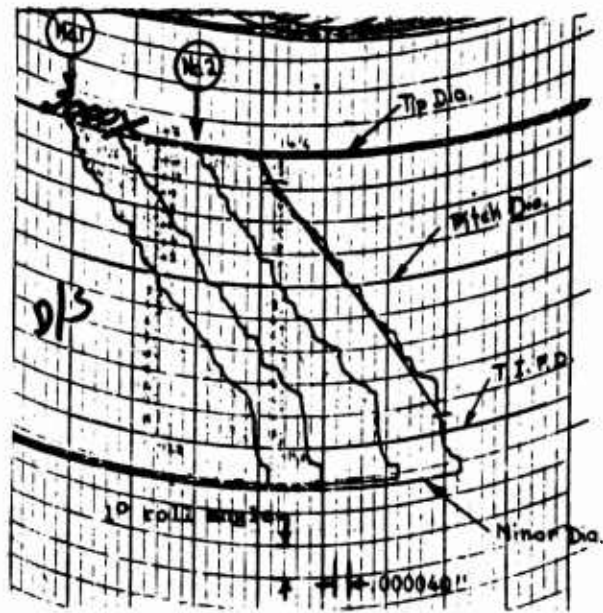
Gear Tooth Profile Measurements on the Sun Gear.
